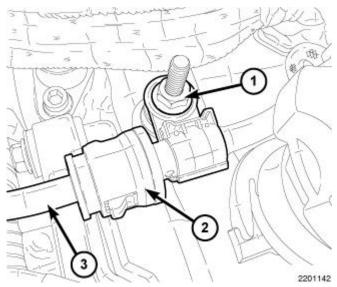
Fuel Injector Return Line & Retaining Nut Courtesy of CHRYSLER LLC
